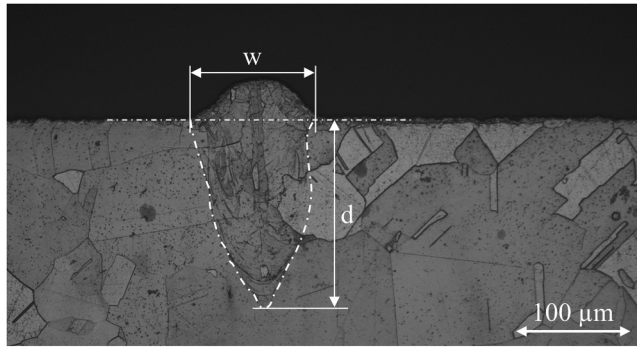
Exemplary cross section of a weld track with weld width  $w$  and weld depth  $d$ .
